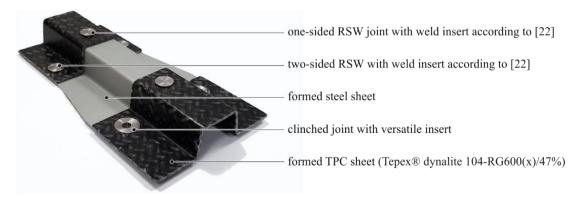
Technology demonstrator with clinched and welded joints using inserts as joining interfaces.
